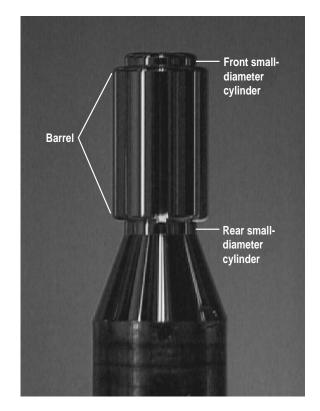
Machined copper mandrel for fabricating a NOVA gold hohlraum. The barrel is typically 1.6 mm long.
